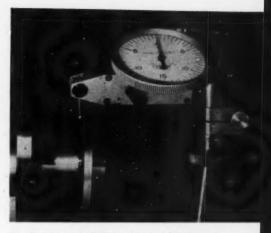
Face whobble in the gear blank must not exceed 0.0002 inch per inch of diameter.
